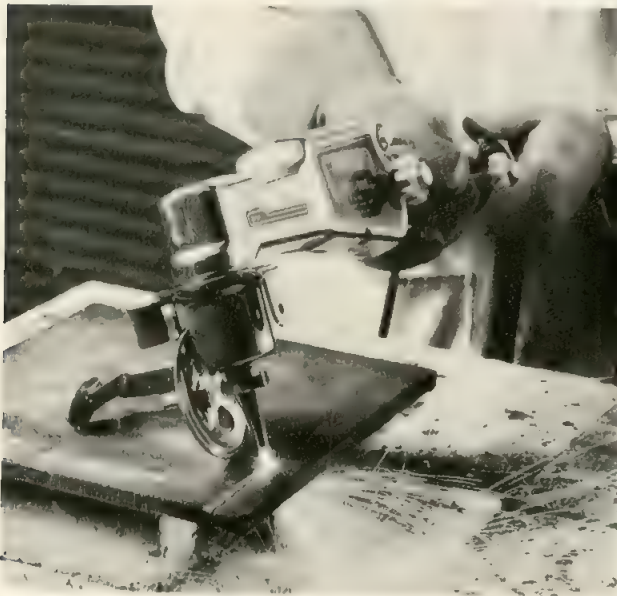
Semiautomatic oxygen cutting equipment.
